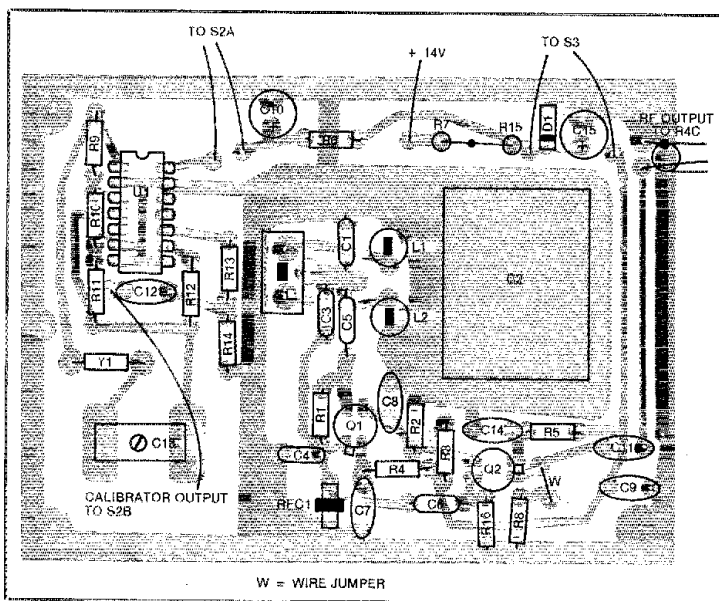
Parts-placement guide for the general-coverage receiving adapter. Parts are placed on the unclad side of the board; the shaded area represents an X-ray view of the copper pattern.
